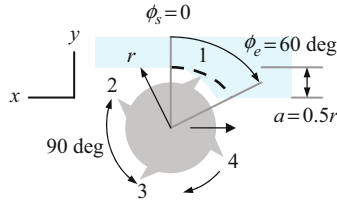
25% radial immersion up milling cutting forces for Ex. 4.1.2
